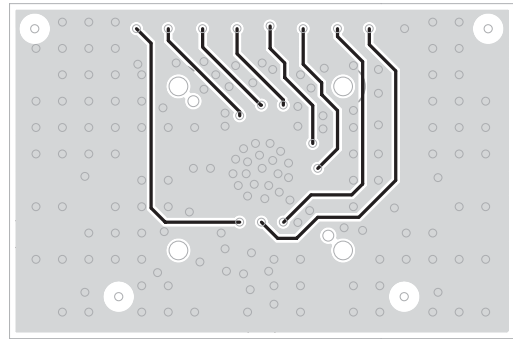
SKY65338 Evaluation Board Assembly Drawing
